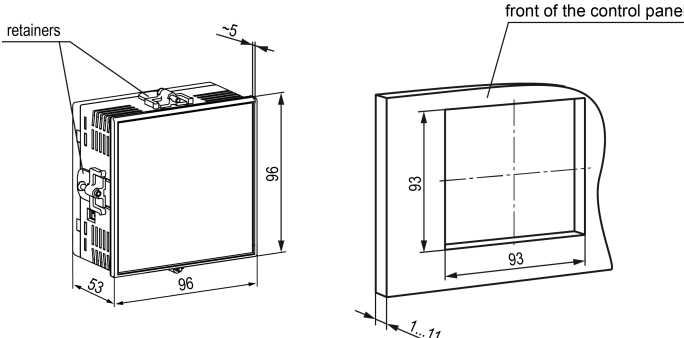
Dimensions of P1 enclosure and mounting cutout
